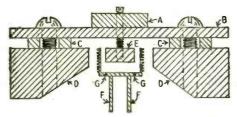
Cross-section of completed assembly at line X-X. A—coil mount; B—pole piece mount; C-C—magnet spacers; D—pole pieces; E—magnetic core screw assembly; F—needle chuck and coil; G-G—Coil suspension wires.
